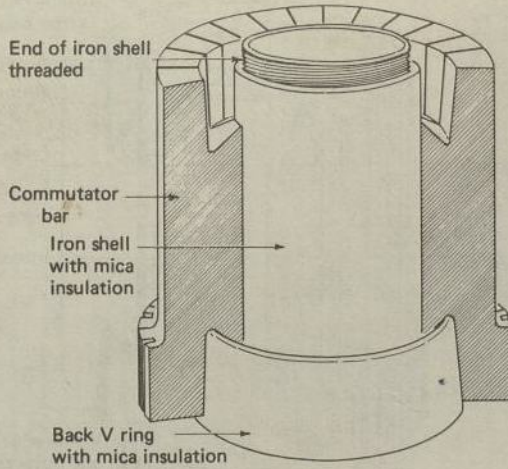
A commutator with the front V ring and half the bars removed.
